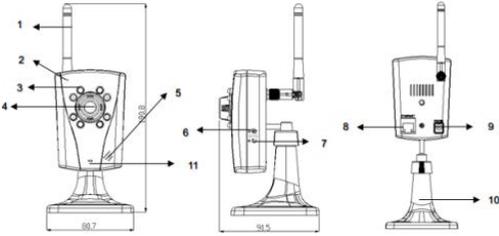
PHYSICAL DIMENSION B & PICTORIAL INDEX
